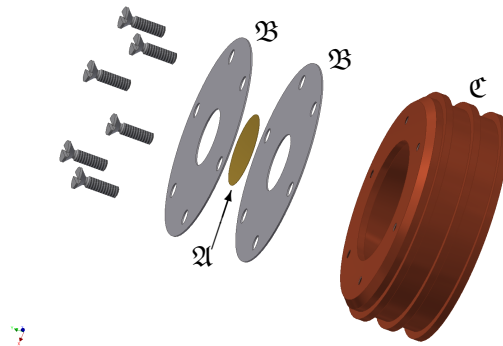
Assembly of the Sample Holder for Crystals — A single crystal (α) or other thin sheet material is spot-welded between two tantalum^a sheets (β) and fastened on the copper sample holder (ϵ).
